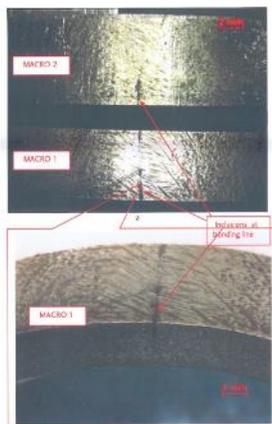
Inclusion at pipe weld seam on vintage NPS 2 gas main
